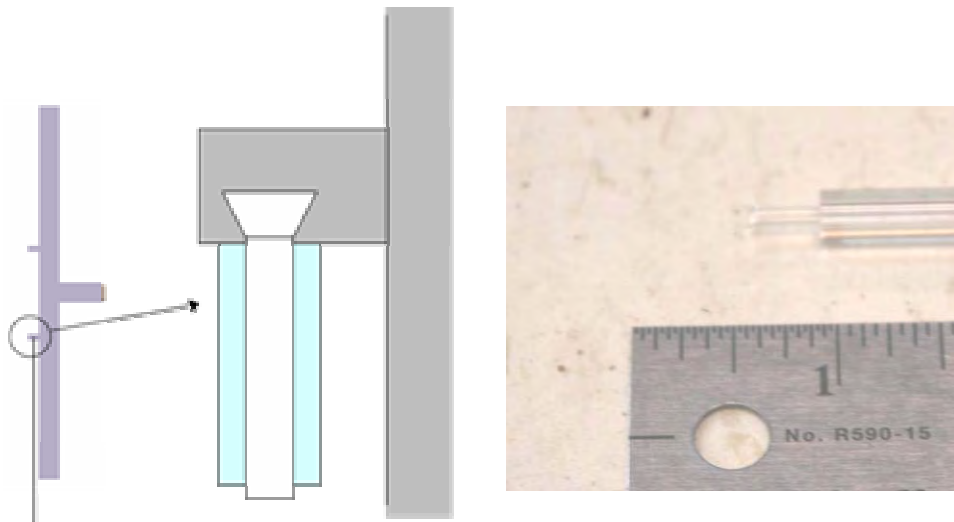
Quartz rod and tube assembly illustrating the bulged end.
